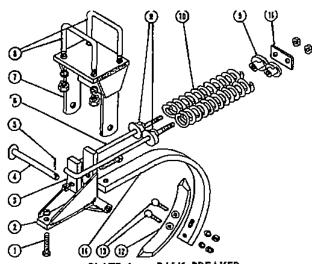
BALK BREAKER ATTACHMENT -- MACH. NO. 299049
